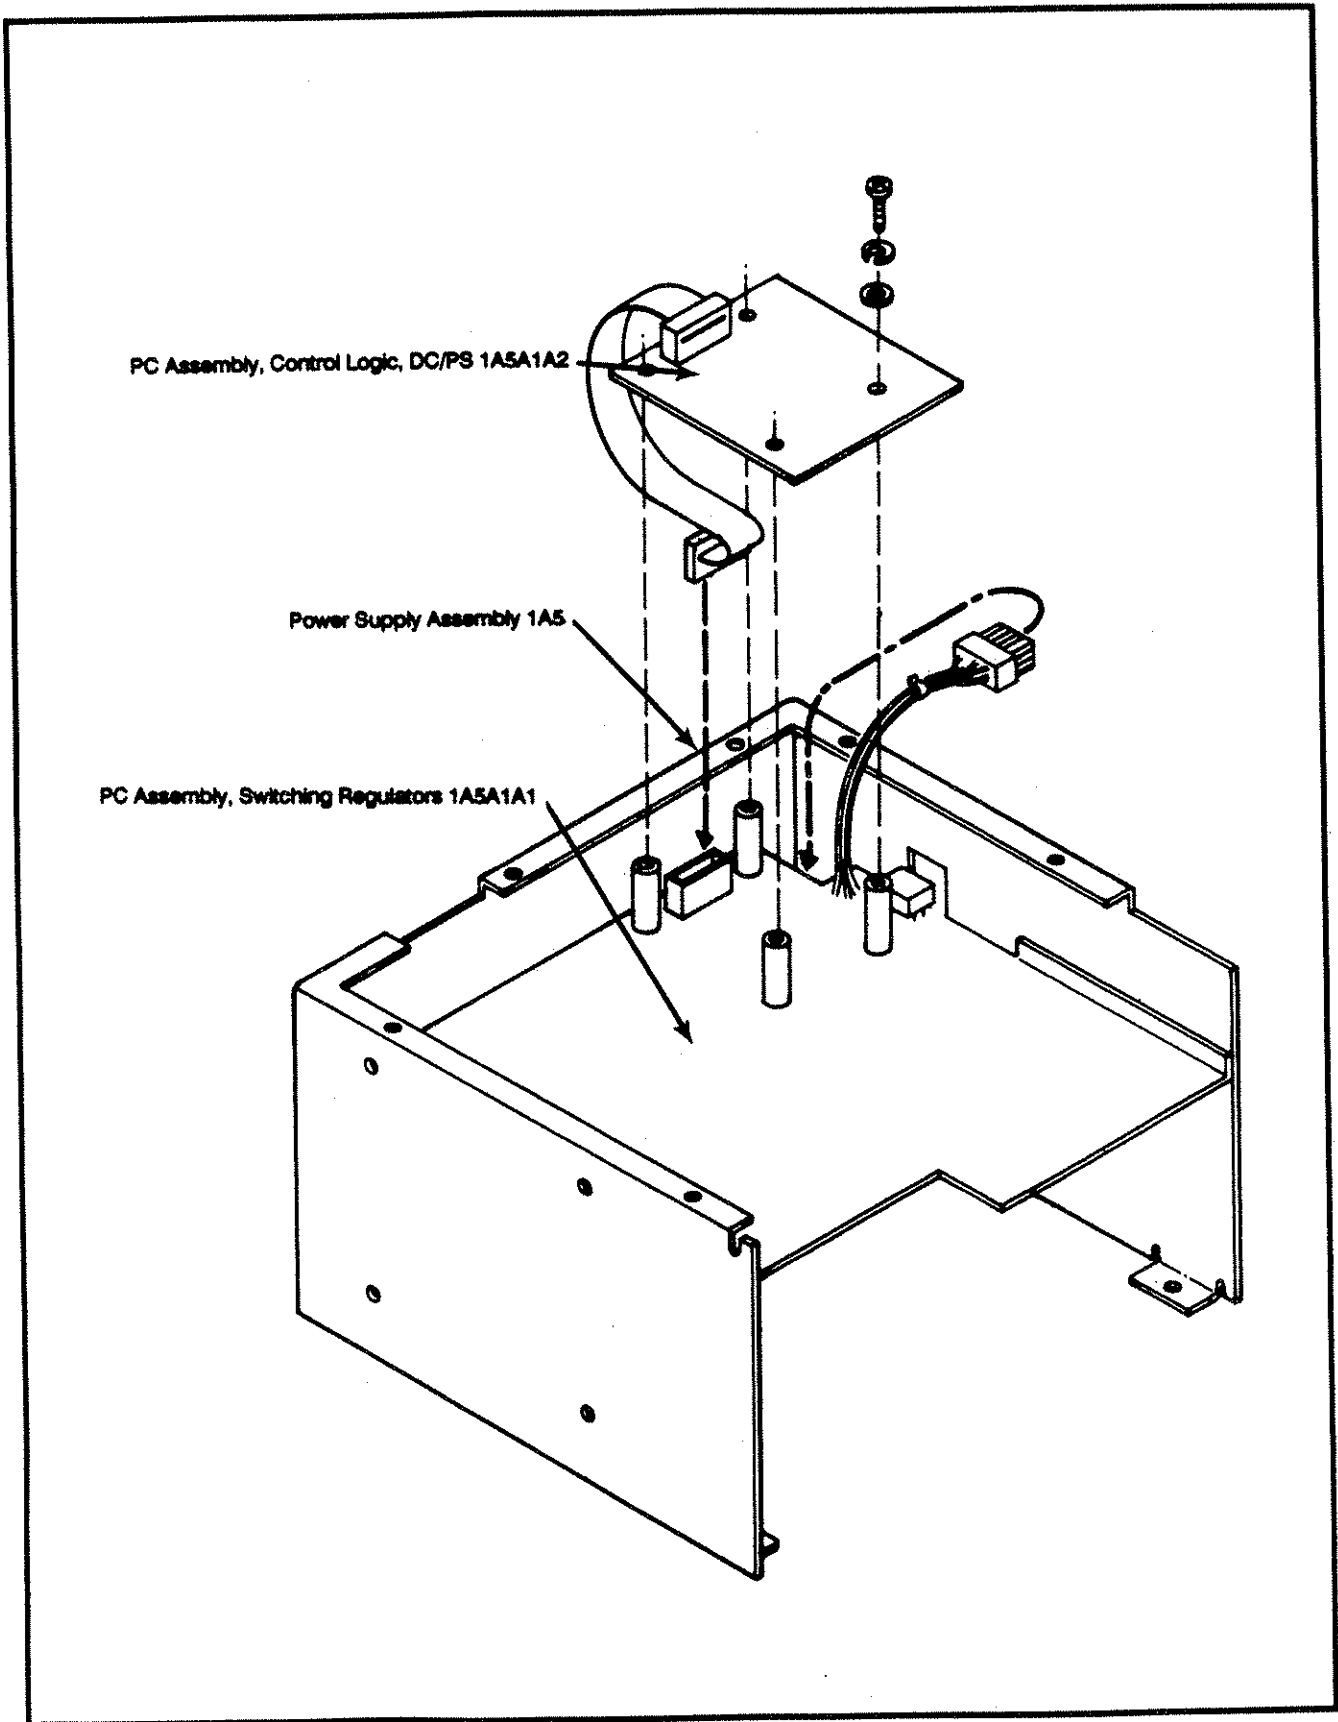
Removal/Installation of DC Power Supply PC Board 1A5A1A2.
